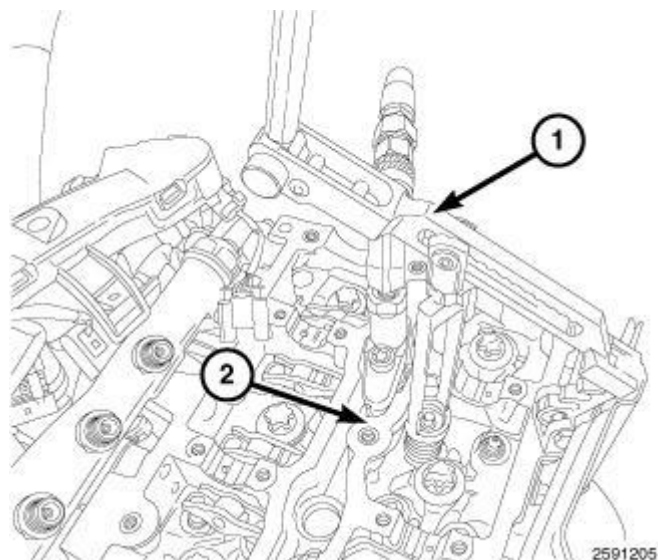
Valve Spring, Keeper, Retainer, Spring Seat, Valve Stem Seals & Valve
